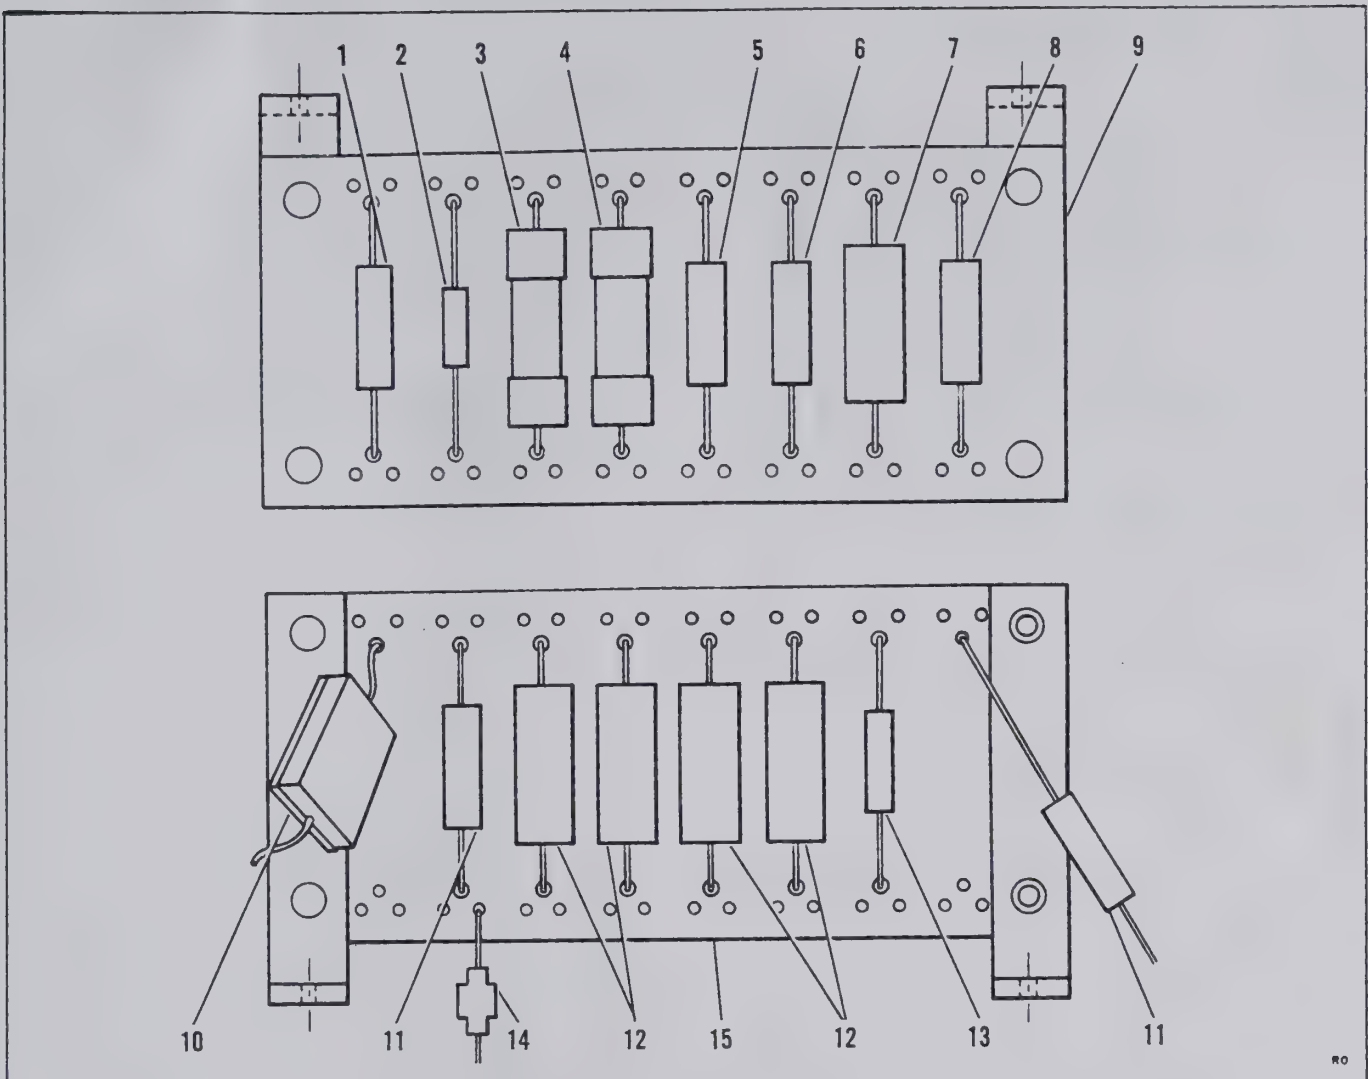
Printed Circuit Board Assembly, Part No. 400D-75G
